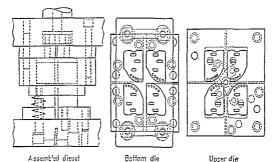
Die for producing slide, which is assembled to spice-box cover,
